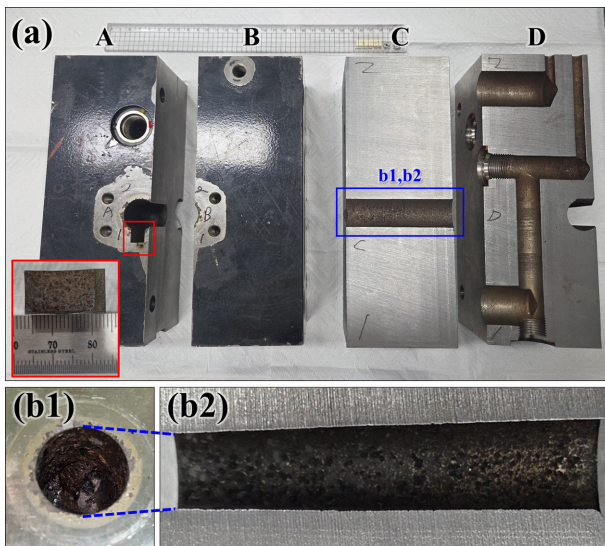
Overall appearance of the manifold block and internal lubricant passages
